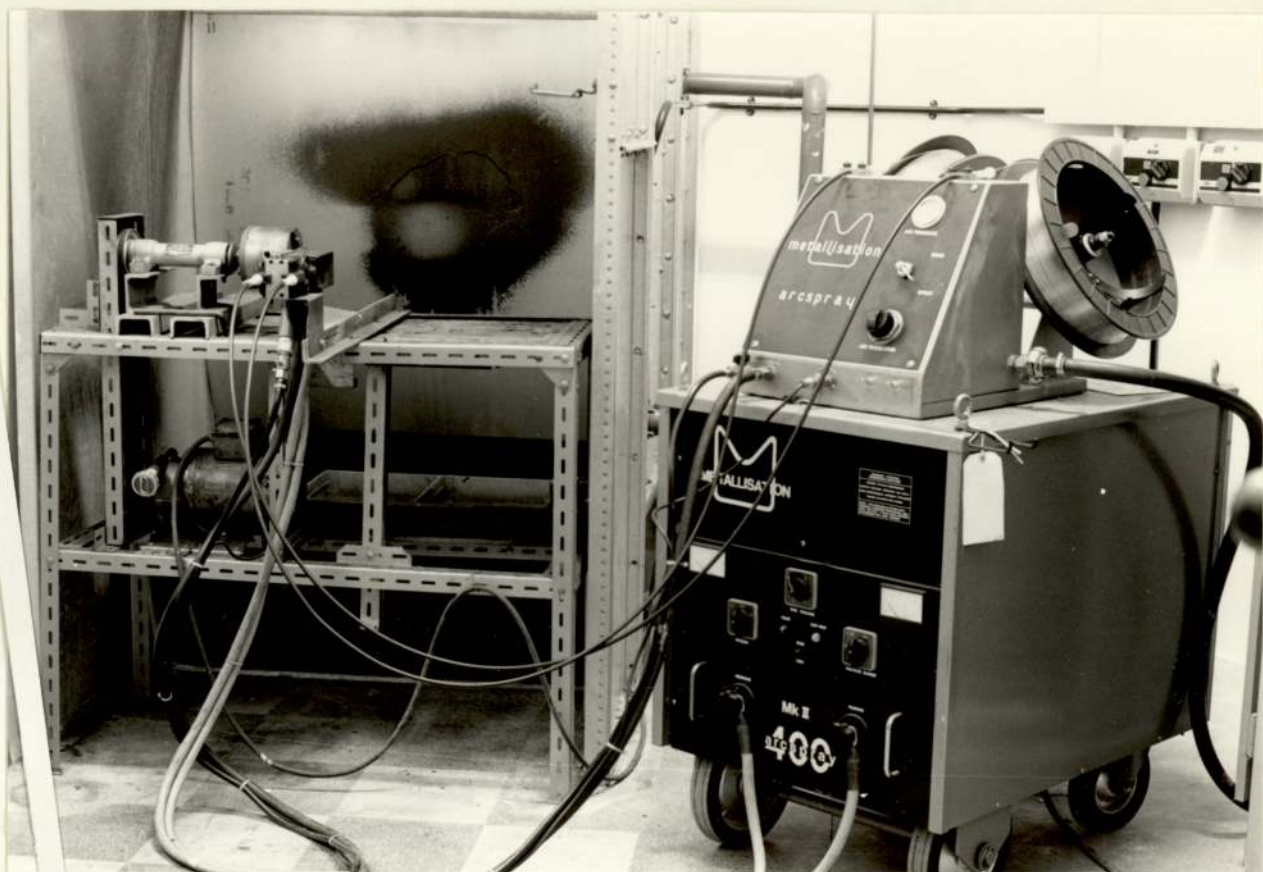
Arc Spray Gun in Position to Spray Shear Test-Pieces
